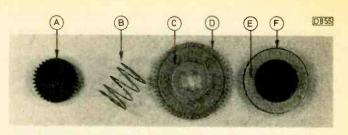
Dismantled clutch assembly. Key: A upper gear; B tension spring; C clutch plate; D central gear; E friction pad; F lower gear.
